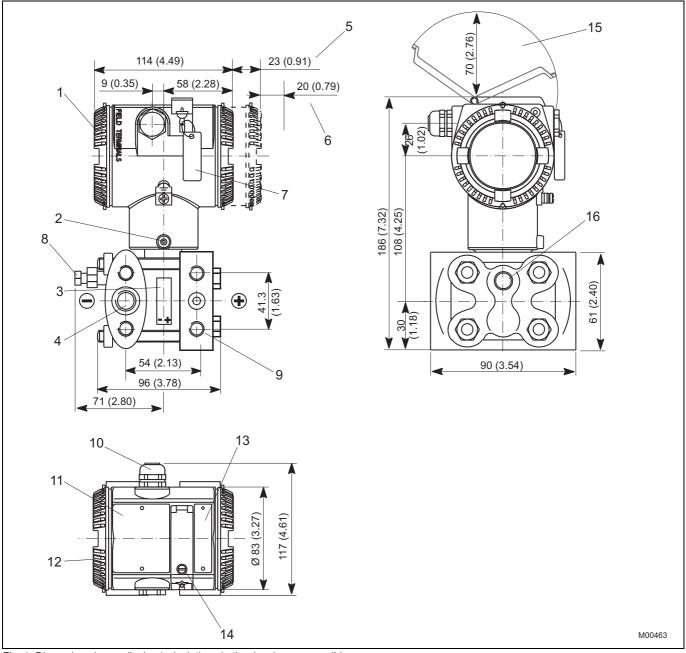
Dimensions in mm (inches), deviations in the drawing are possible
